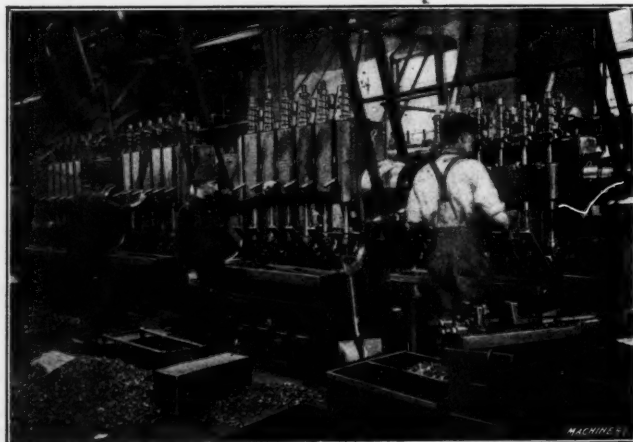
A Row of Six-spindle Acme Semi-automatic Nut-tapping Machines
